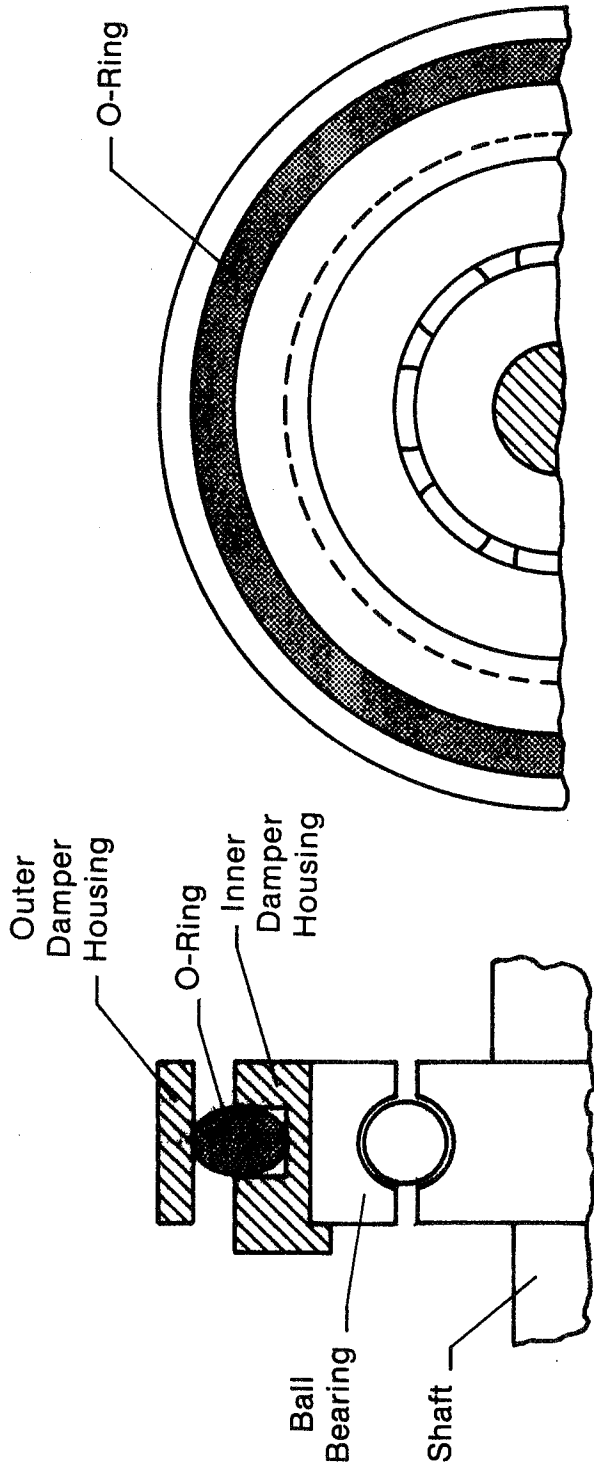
Example of O-Ring Elastomer Damper Configuration
